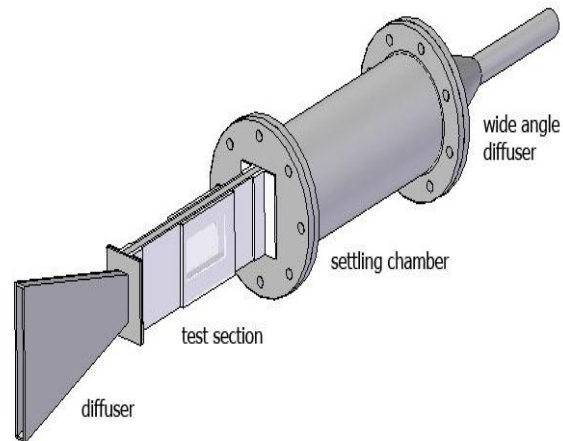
Settling Chamber – Wide Angle Diffuser Assembly
